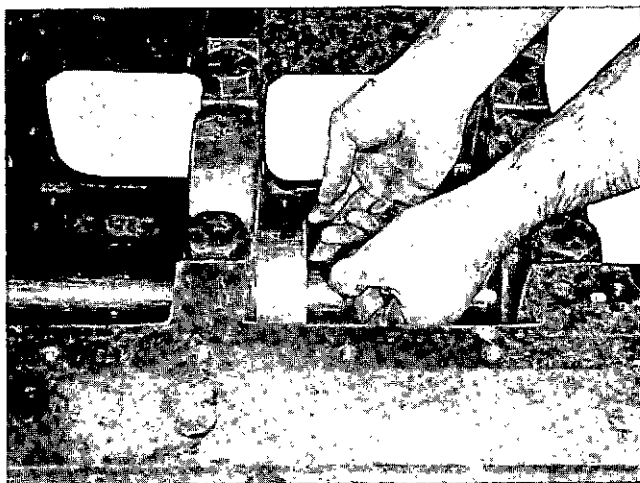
, V40187. Checking main bearing bore with ST-1177
